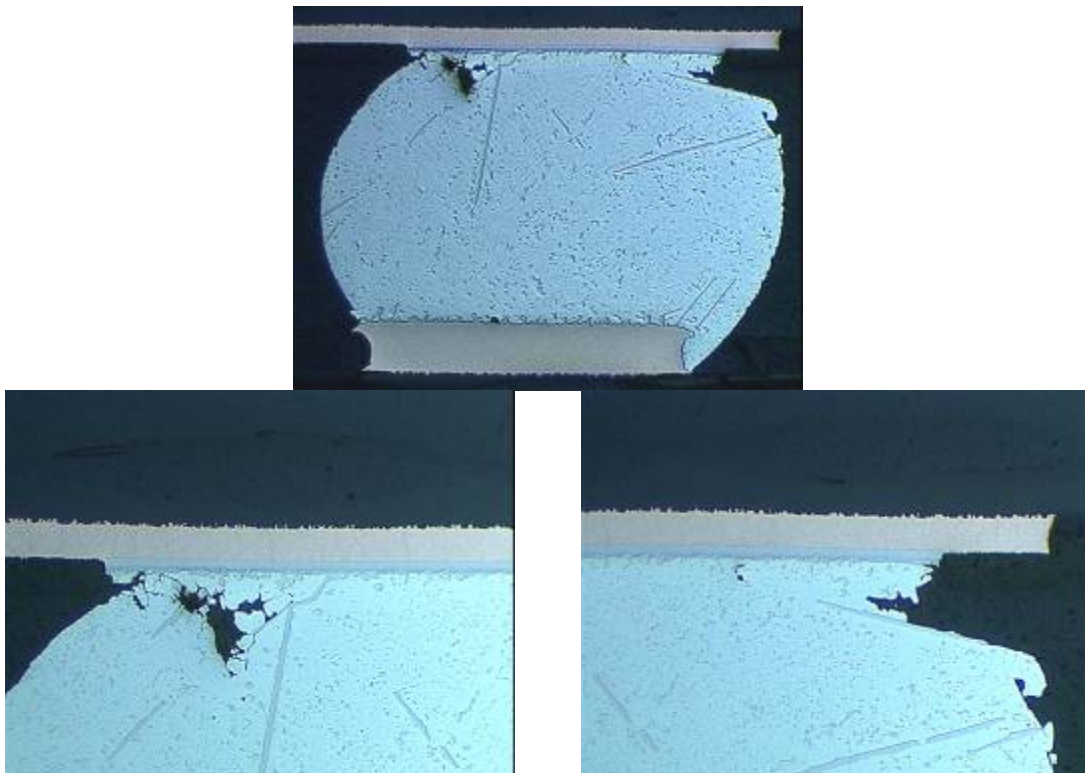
(top) BGA-225 SAC-SAC solder joint; (left, right) magnified view of solder joint (test vehicle 85)
